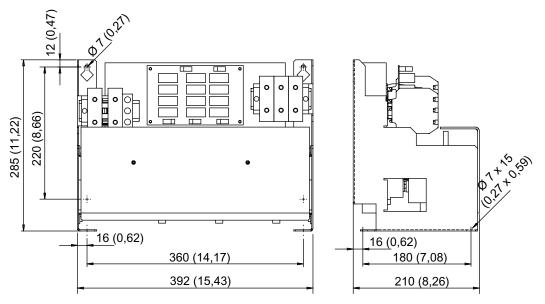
Dimension drawing of the voltage peak limiter, type 2
